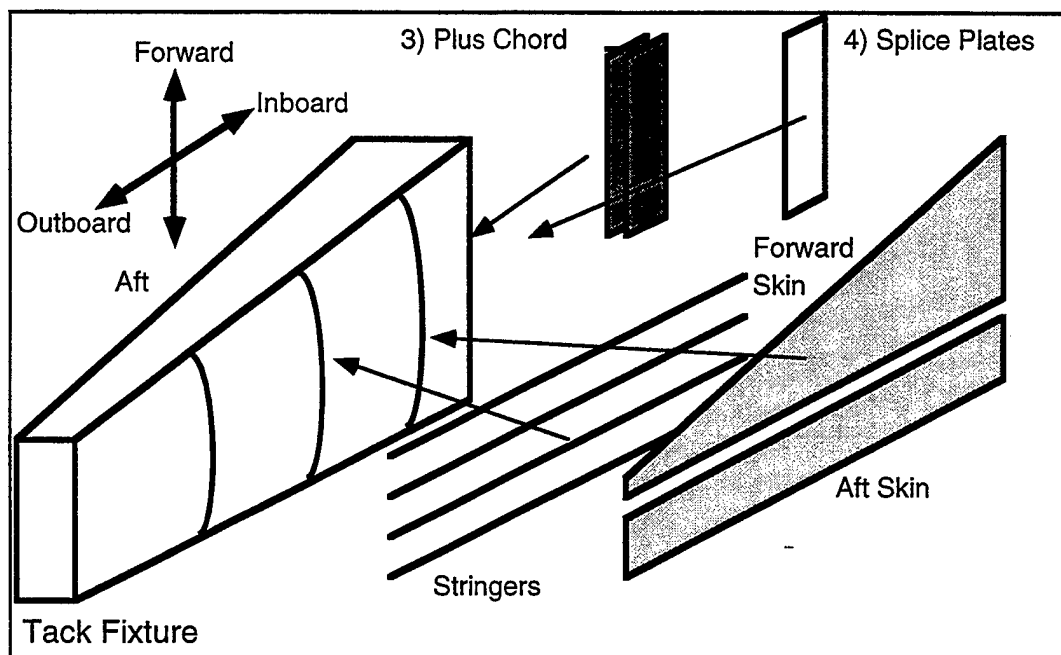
Current assembly sequence in the dedicated tack fixture.
